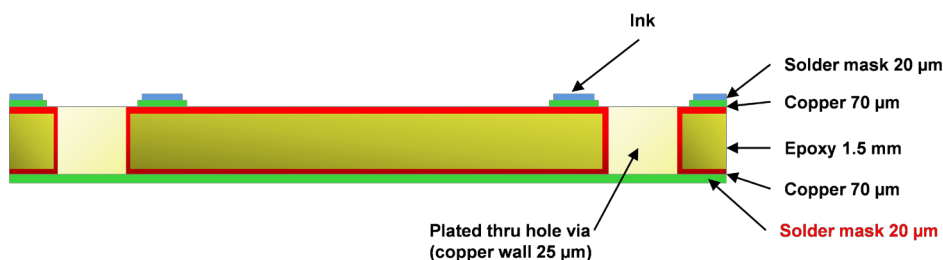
Cross section of FR4 based PCB with open thermal vias.
